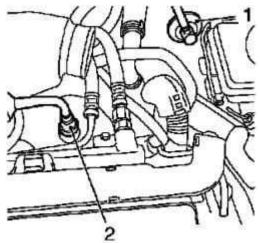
Disconnecting the vacuum magastrali: 1 - elbow pipe, 2 - latch mounting vacuum line
